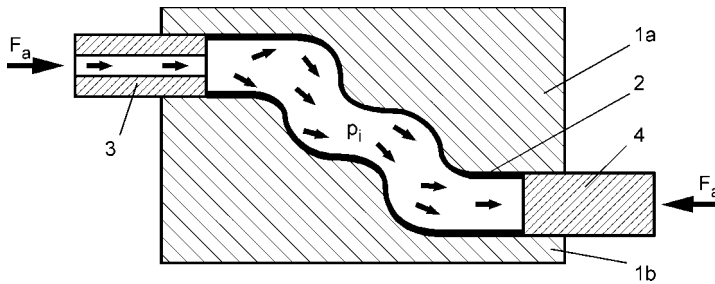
Hydroforming: operation step—calibration. F_a , closing force; p_i , internal pressure; 1a, upper die half; 1b, lower die half; 2, workpiece (tube); 3, mandrel (with inlet for the secondary hydraulic fluid); 4, mandrel.
